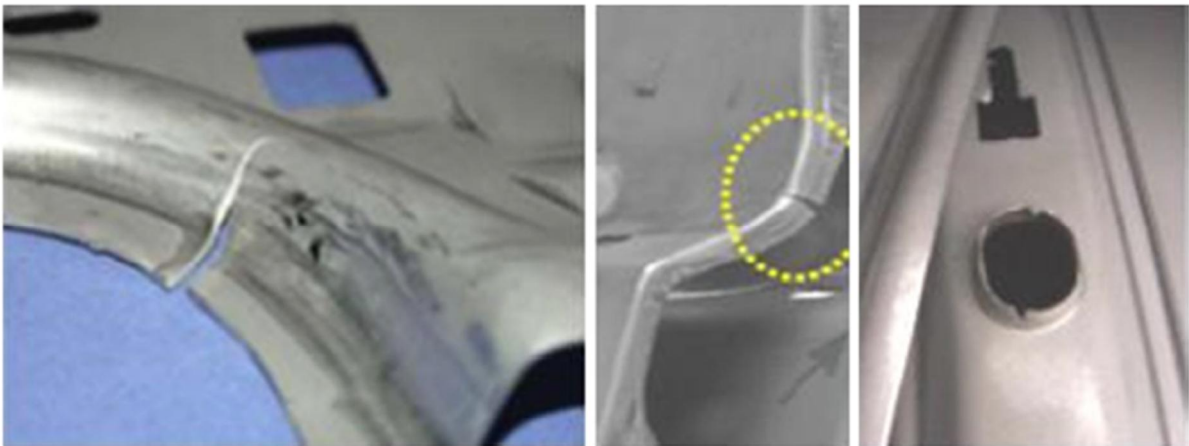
Cracks produced in cold formed AHSS automotive parts
